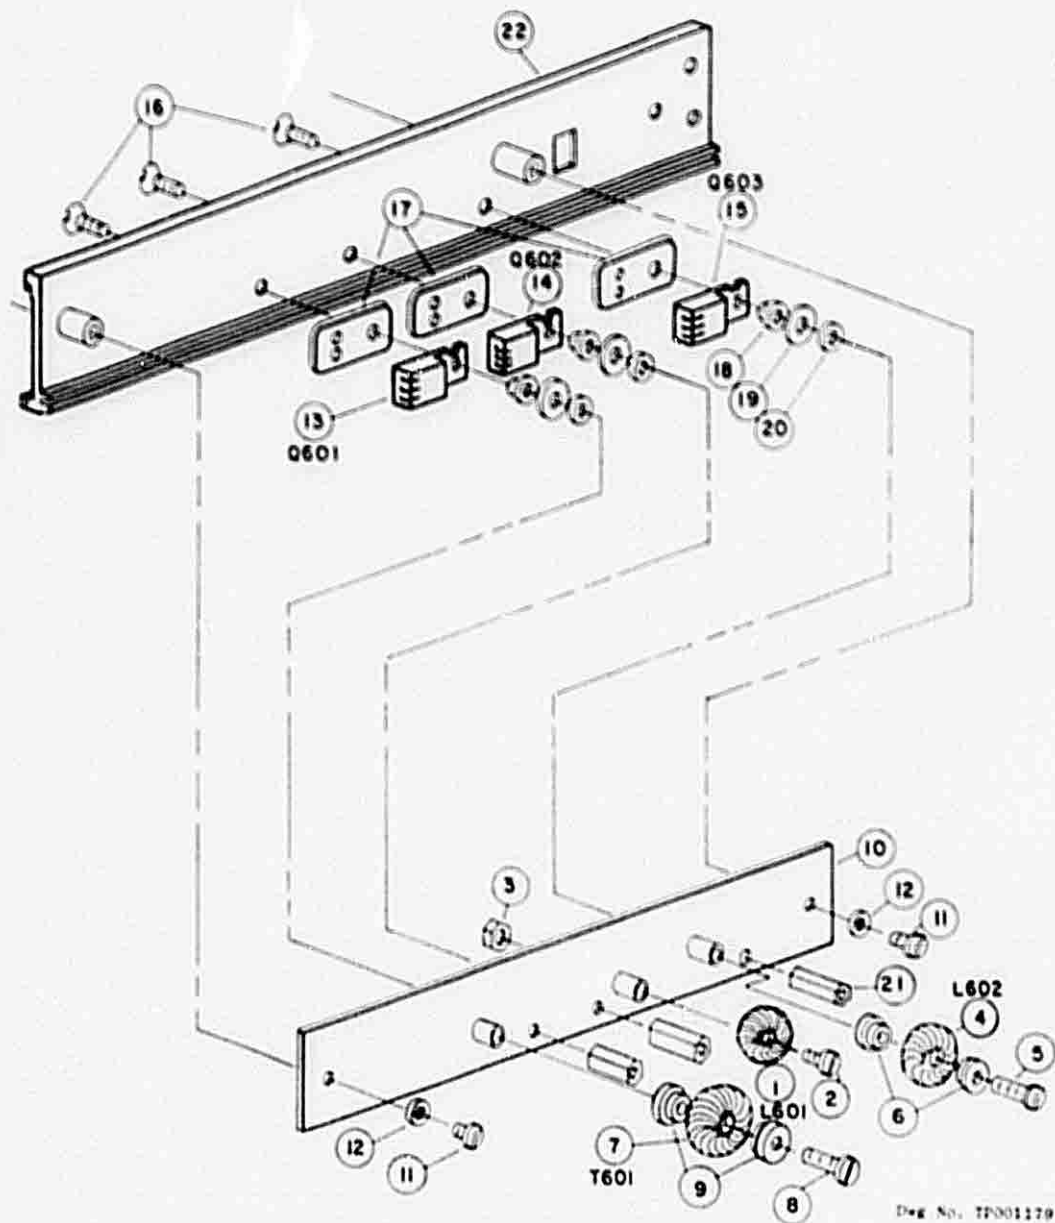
POWER SUPPLY AND RIGHT SIDE PANEL
